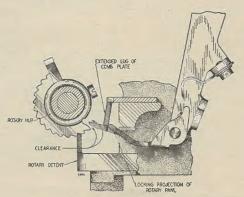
LOCKING OF ROTABY PAWL WITH COMB-FLATE LUG (CARRIAGE ON 12TH STEP)
